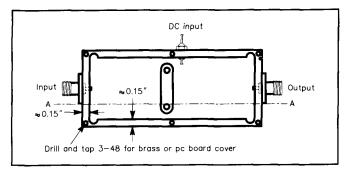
Top view of the brass amplifier case used by WA3JUF, before the PC board is installed. The bottom of the case is milled out to clear the device mounting flange.
